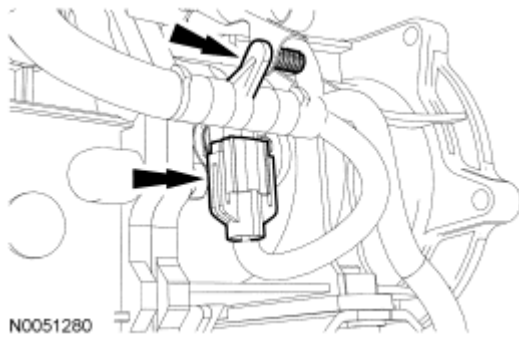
Locating Wiring Harness Retainer & Transmission Electrical Connector
